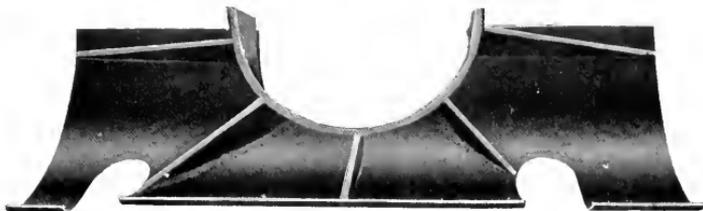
Part of a Modern Spray Shield for Destroyer Guns. Electric welding gives light weight construction impossible with riveting
